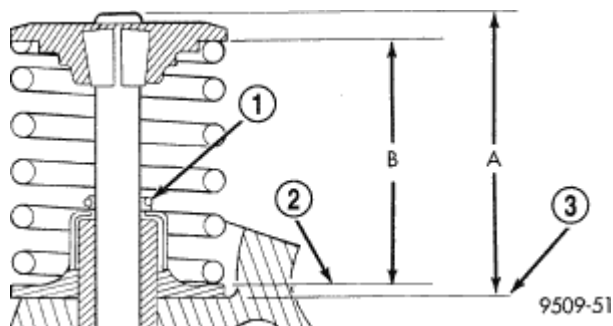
Checking Spring Installed Height & Valve Tip To Spring Seat Dimensions
